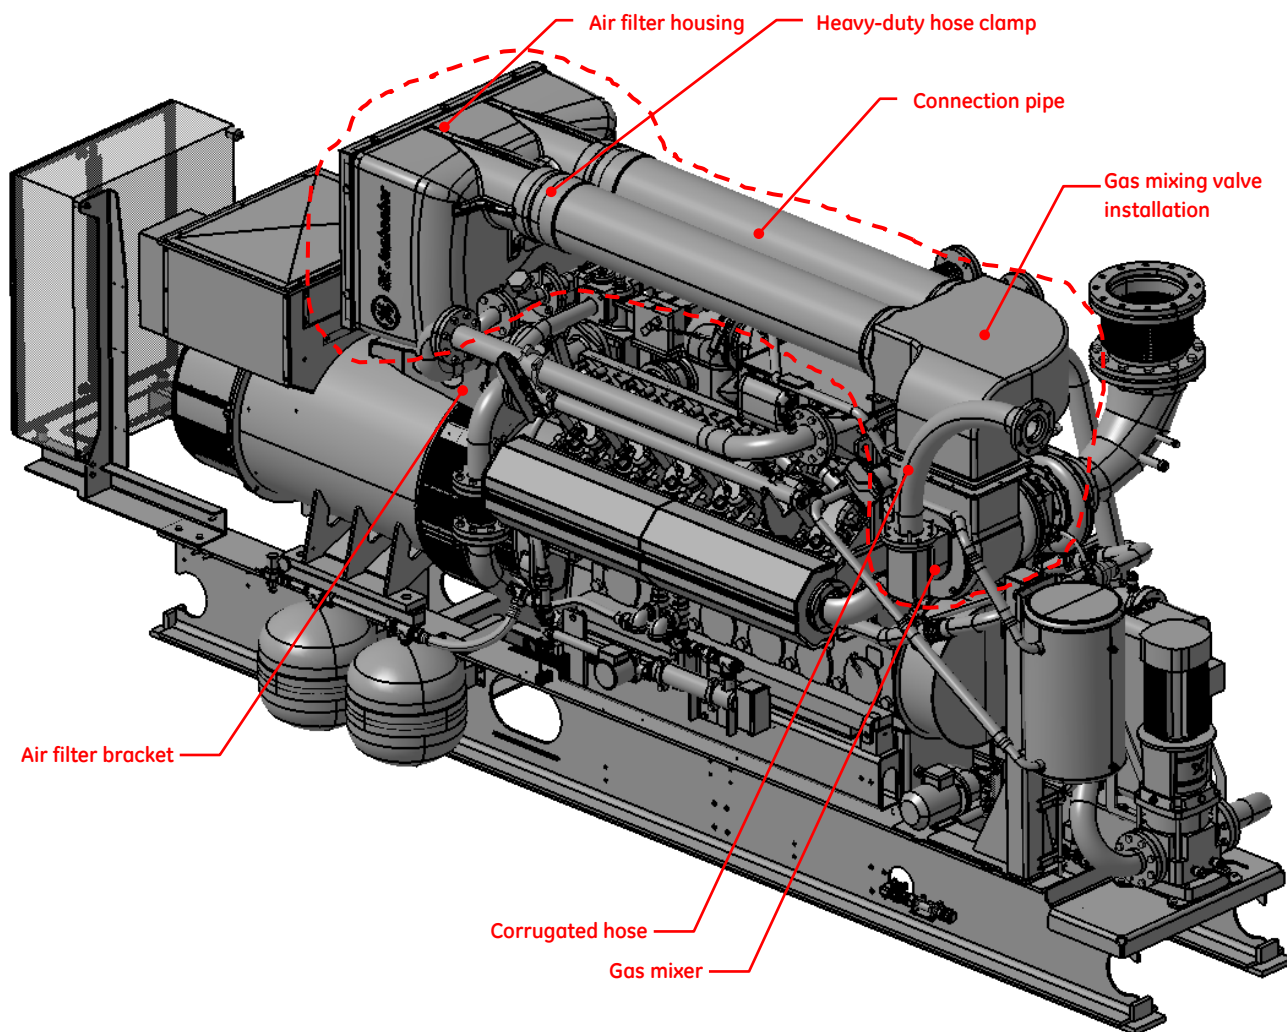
Removing the connecting pipe, air filter and air filter bracket
